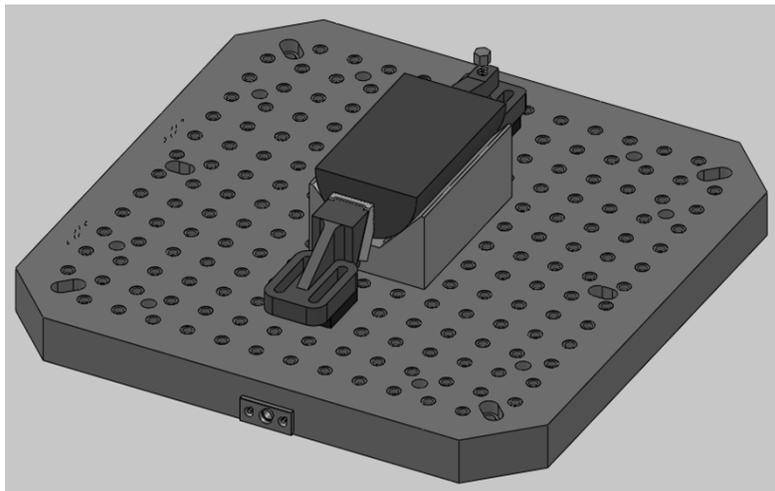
The complete layout of modular fixture elements generated after assembly.
